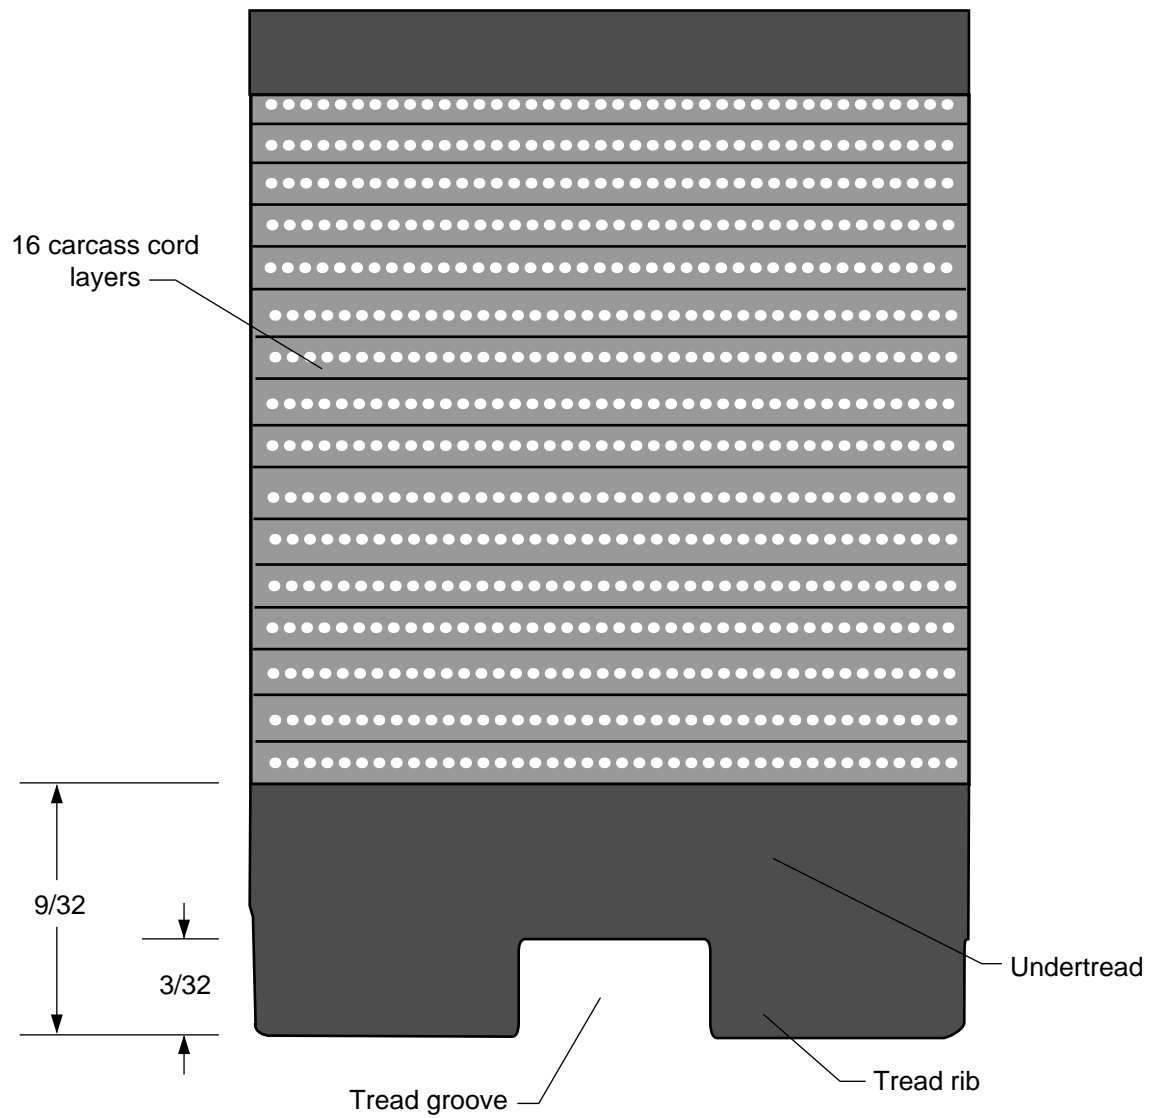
Cross section of modified Orbiter main gear tire. Dimensions are in inches.
